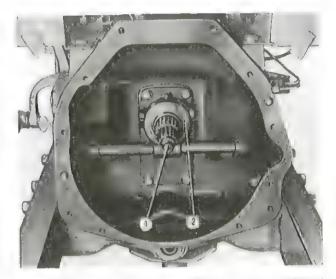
• View of clutch assembly housing compartment after engine removal.
